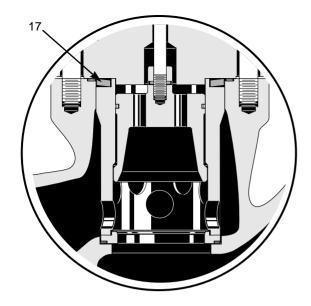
Series 41400/500/900 HD Trim (High Duty) Only on 3" & 4" (80 & 100 mm) Valve Sizes
